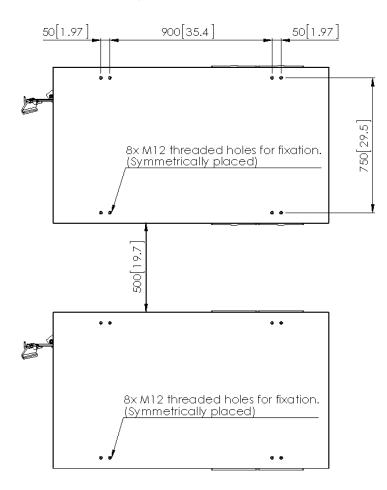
Spacing between units and mounting holes for bracket.
